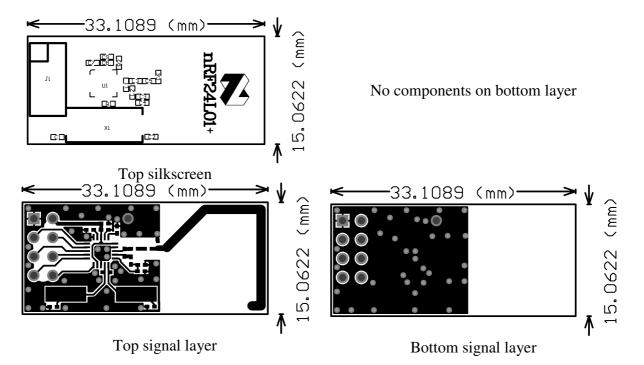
nRF24L01+ REFMOD with PCB antenna PCB layout
